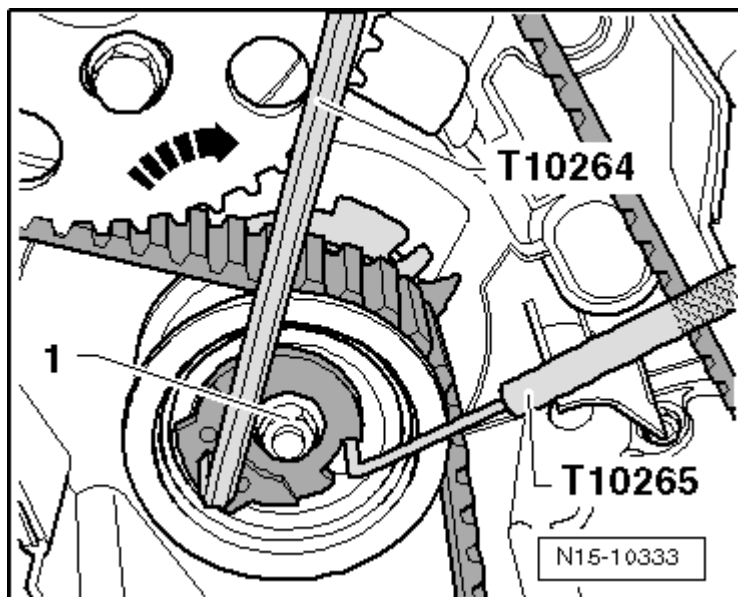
Identifying Long Reach T10264 And Locking Tool T10265
